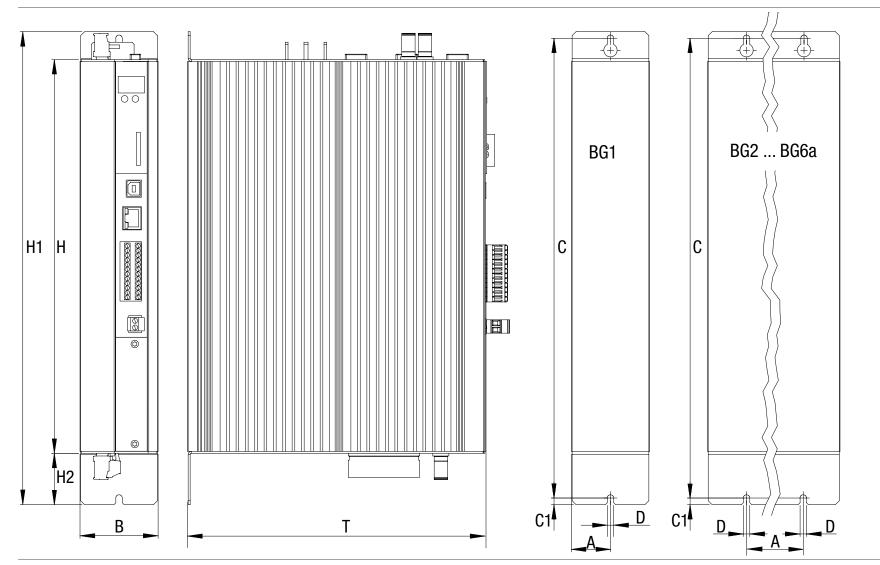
Dimensional drawing of housing with air cooling, schematic representation for BG1 to BG6a.
